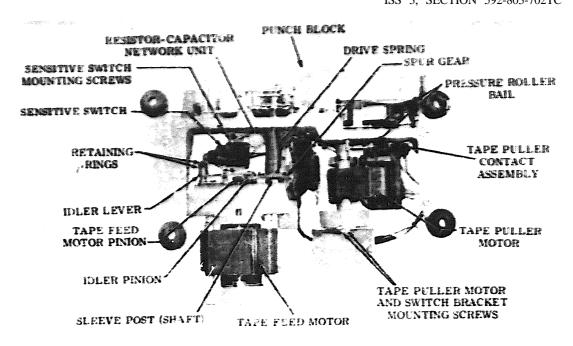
Five-Level Punch Unit Bottom View (2000 WPM)
